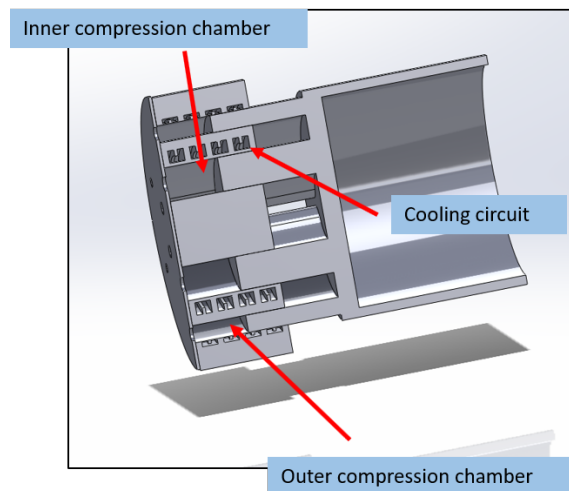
Section view of isothermal core elements of compressor in Design D.
